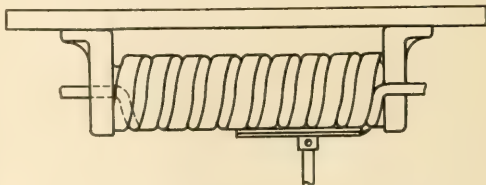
GENERAL DETAIL OF A CHOKE COIL USED ON RAILWAY CARS. THE COIL IS WOUND IN A SPIRAL GROOVE CUT ON A CORE OF INSULATING MATERIAL
